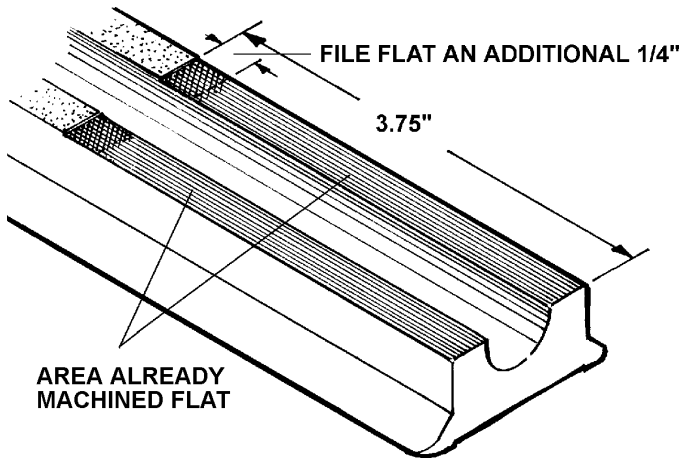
File the top end of the mounting surface of the bed flat. You will be extending the machined flat surface an additional 1/4" or so for a total of 3-3/4" of flat.
